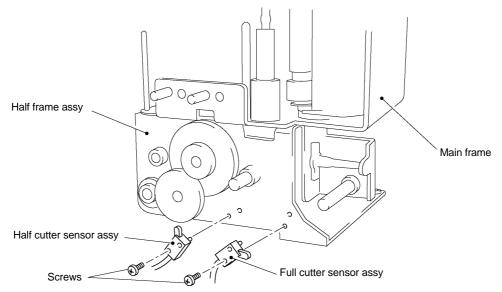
Removing the Half Cutter Sensor Assy and the Full Cutter Sensor Assy
